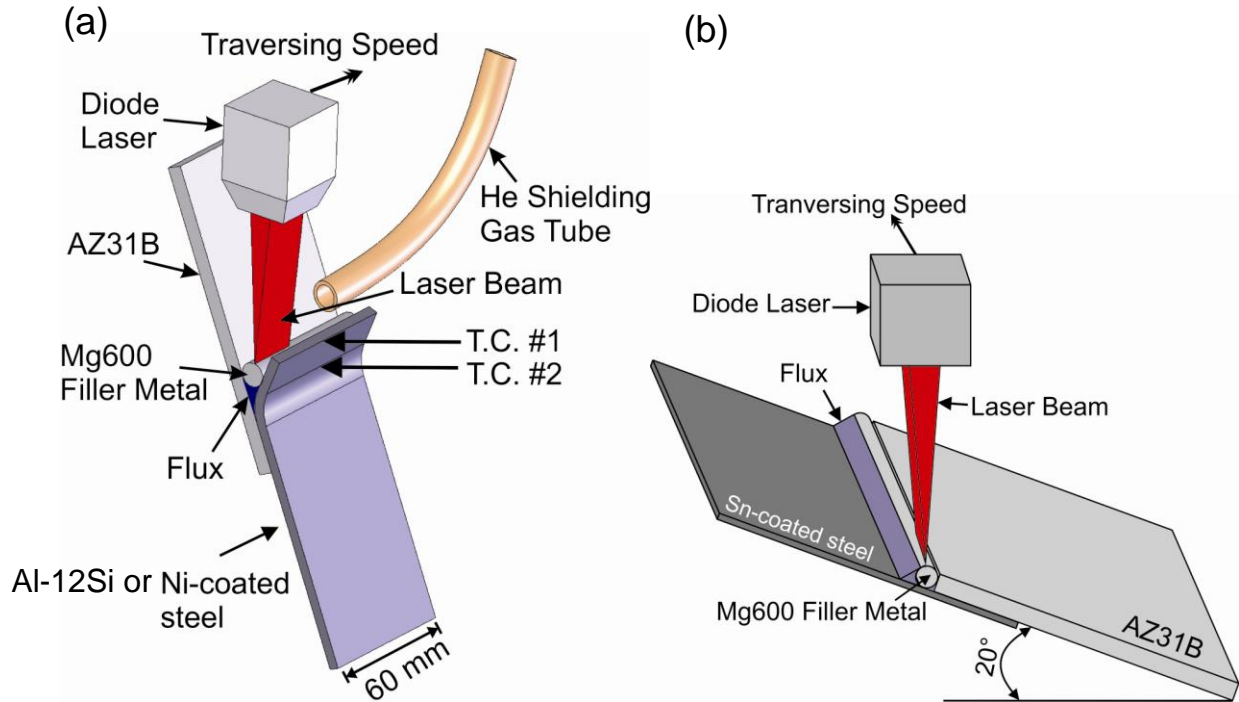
Schematic of the laser brazing system used for joining AZ31 Mg and (a) Al-12Si and Ni plated steel sheets in a single-flare bevel lap joint configuration showing the position of two thermocouples used for temperature measurements and (b) Sn electro-plated steel sheets in a lap joint configuration.
